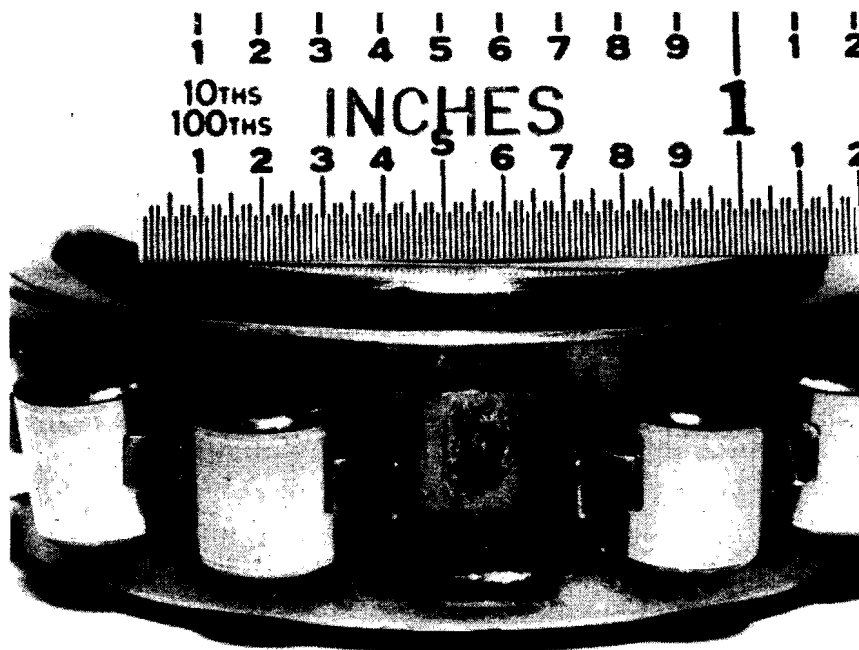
90-Degree Gearbox -406 Bearing Inner Race C/D,
